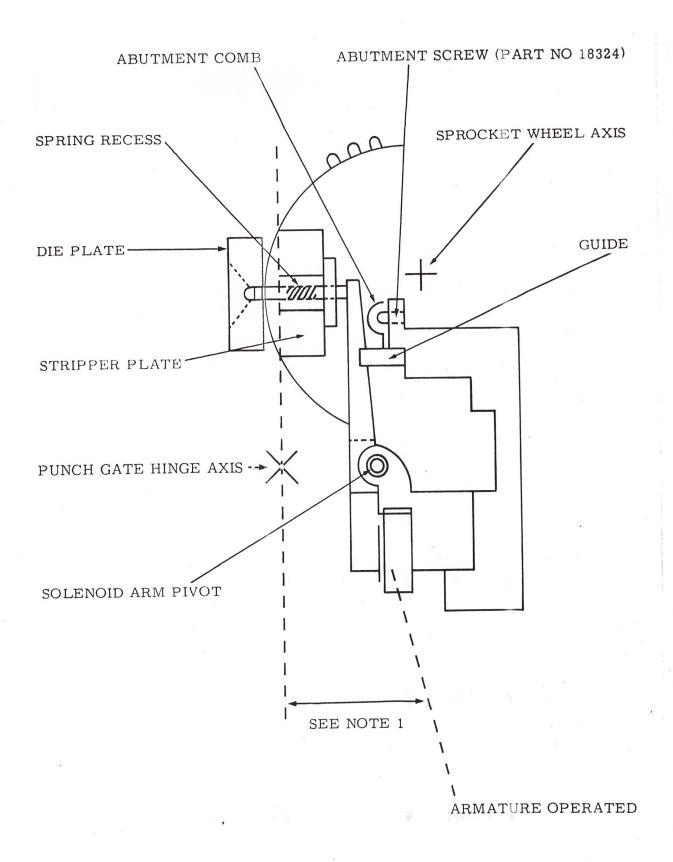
(a) PUNCH PIN AND SOLENOID ARM ASSEMBLY
